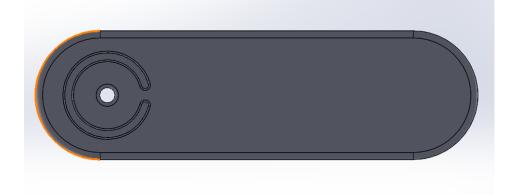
The Outer Side of the Bottom Piece of the Encasement
